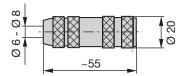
Connector BKS-S103-00 (socket) for BUS IN
